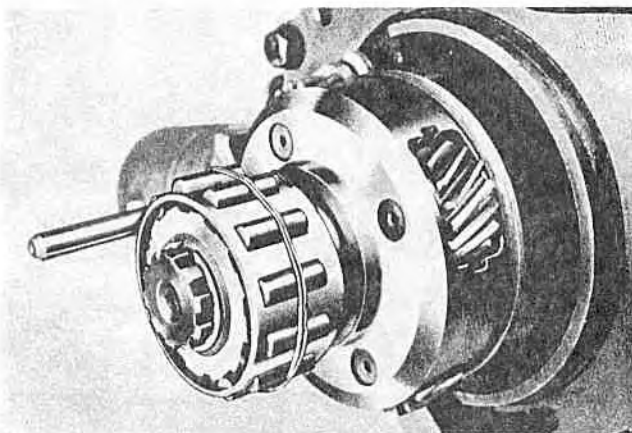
Using a Rubber Band to Hold the Over-Running Clutch Rollers
